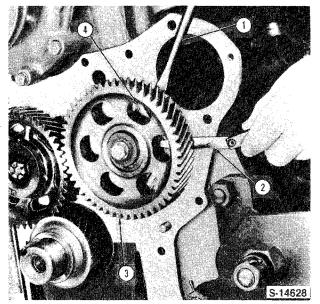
Measuring Camshaft End Play 3. Camshaft Gear 1. Screwdriver 4. Thrust Plate
